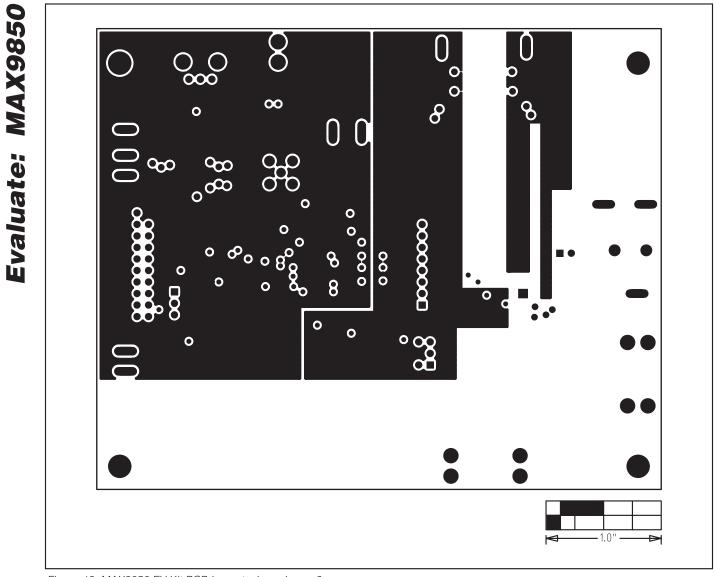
MAX9850 EV Kit PCB Layout—Inner Layer 3
